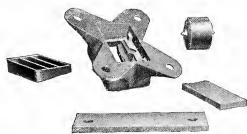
Parts of Single Roller Side Bearing for Freight Cars. Edwin S. Woods & Company.
